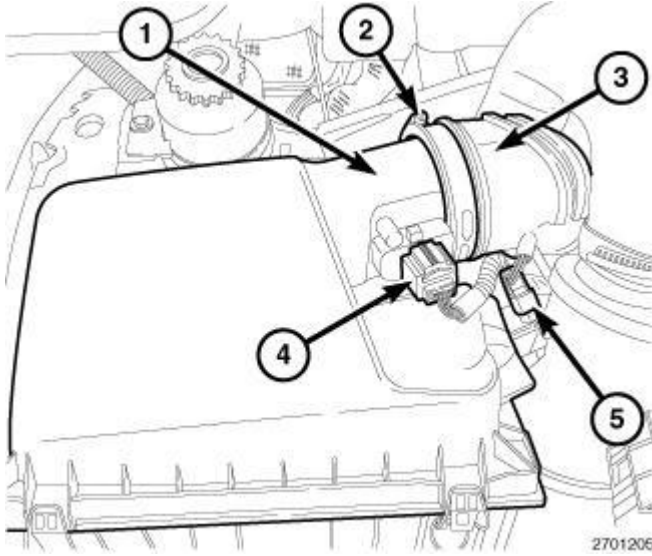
Identifying Air Cleaner Housing, Worm Clamp, Air Cleaner Outlet Tube, MAF Sensor & IAT Sensor
